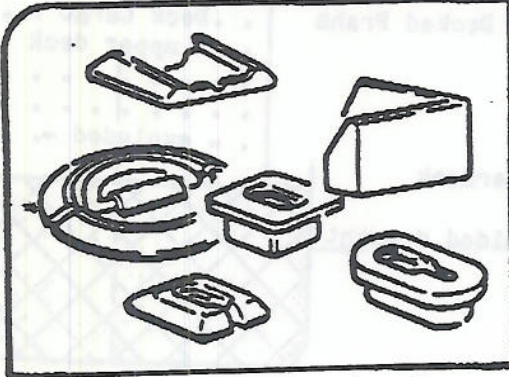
Intermediate & bottom stackers twistlock, bridge fittings
